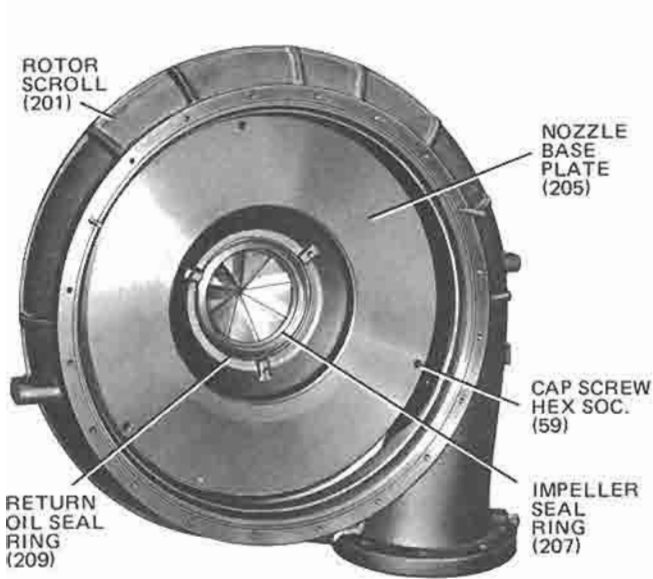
COMPRESSOR ROTOR SCROLL ASSEMBLY
